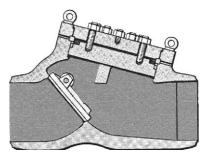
An oblique style swing disc non-return valve Courtesy of Dresser-Masoneilan
